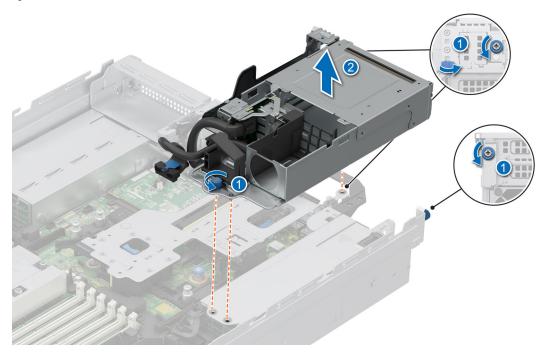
Removing the 4 x EDSFF E3.S rear drive module
